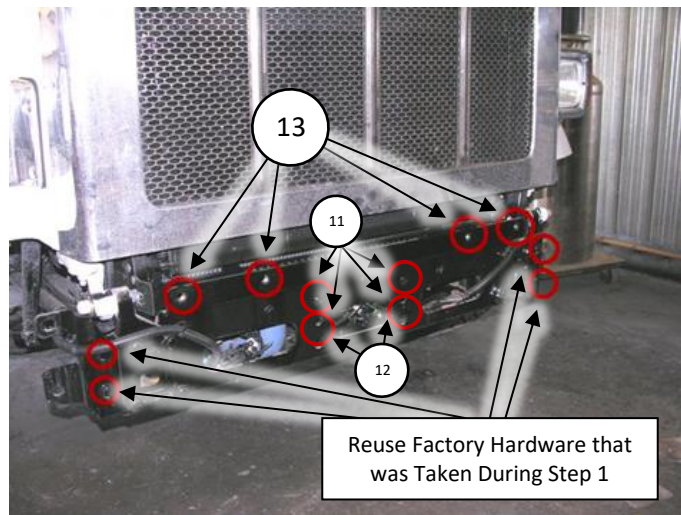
Bracket Installation Front View (PB 365 & PB 367)
